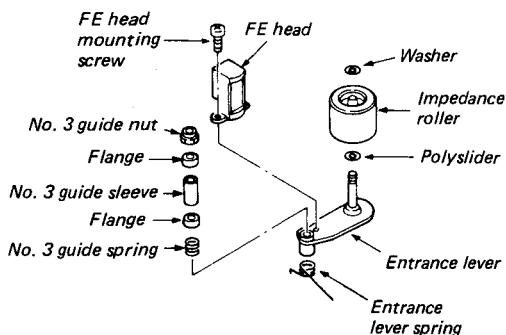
Replacement of No. 3 guide and FE head
